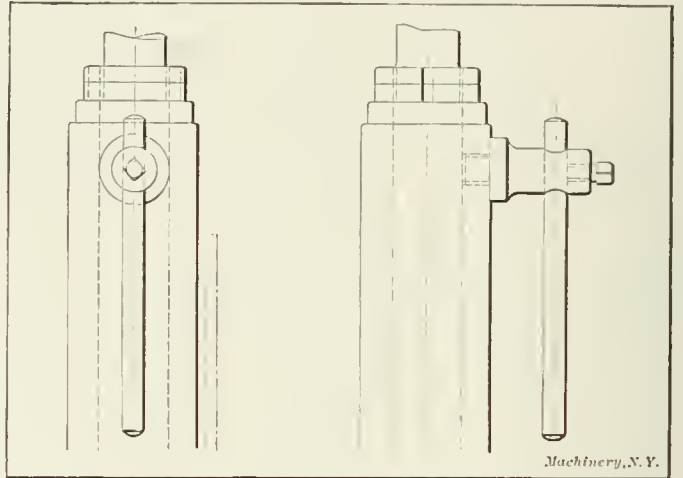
Trip Rod Fitted to Drill Press Sleeve
